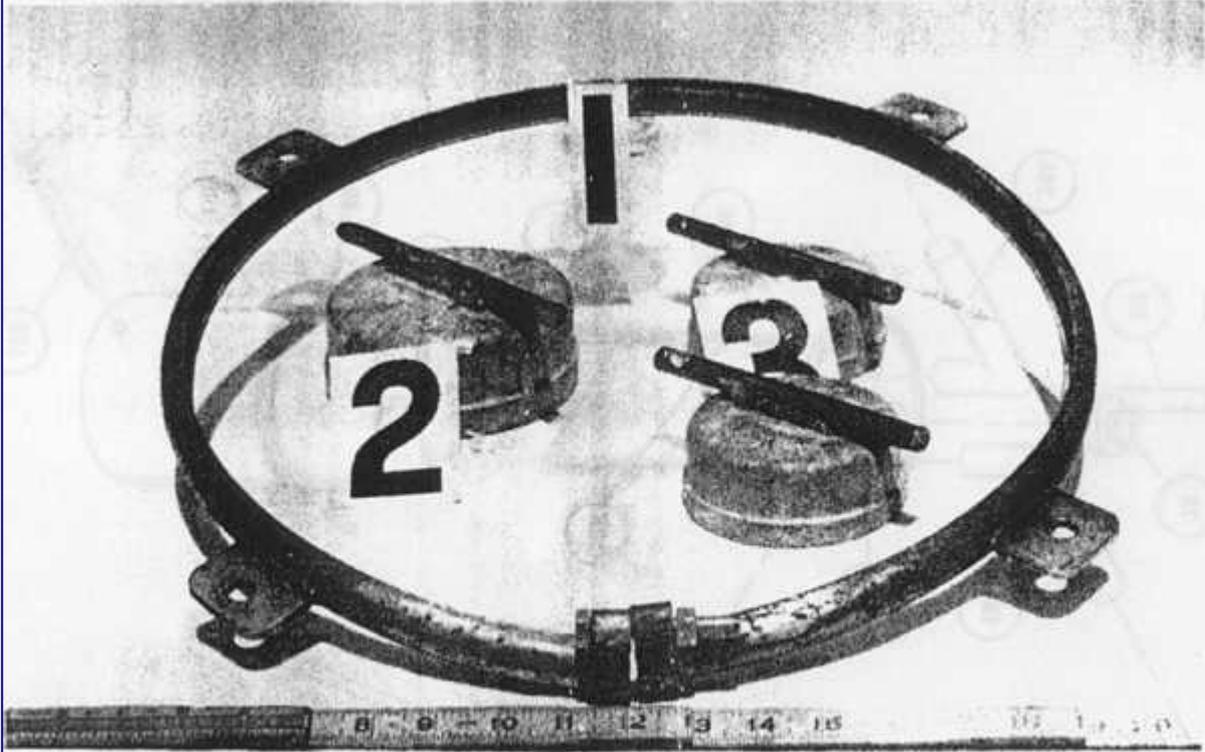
Lock ring and welded tabs. Also pictured inside the lock ring (#1): the ash cleanout cover cap (#2), and the ignition cover cap (#3).
